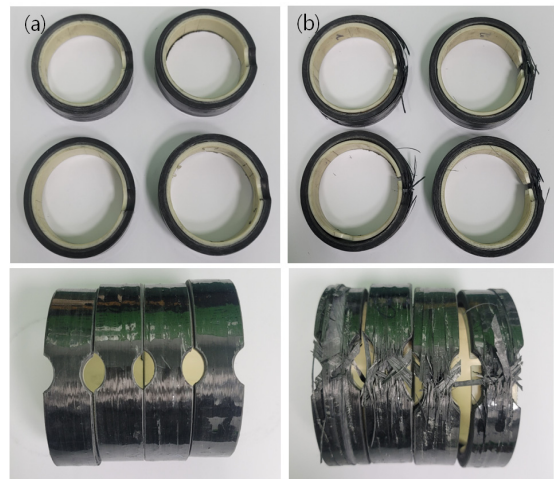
Specimens of hoop tensile test (a) and specimens after fracture (b)
